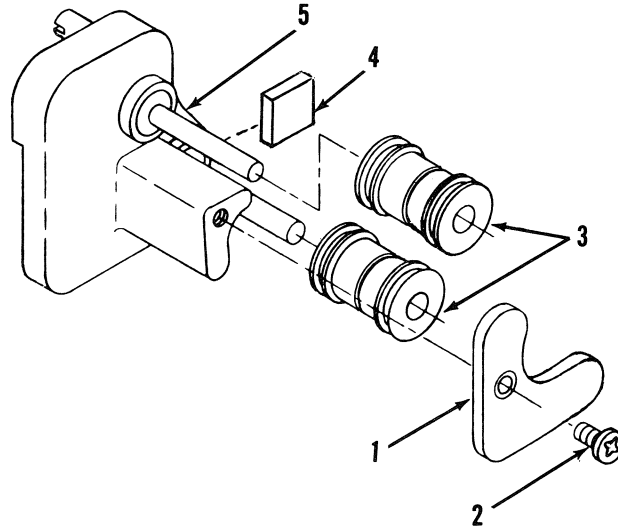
TAKEUP SPROCKET SHOE ARM COMPLETE
